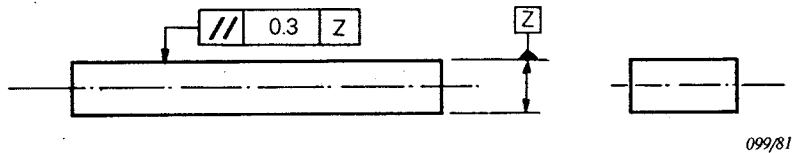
The plane on which the tolerance is put should be contained between two planes 0.3 apart and parallel to the Z reference plane.
